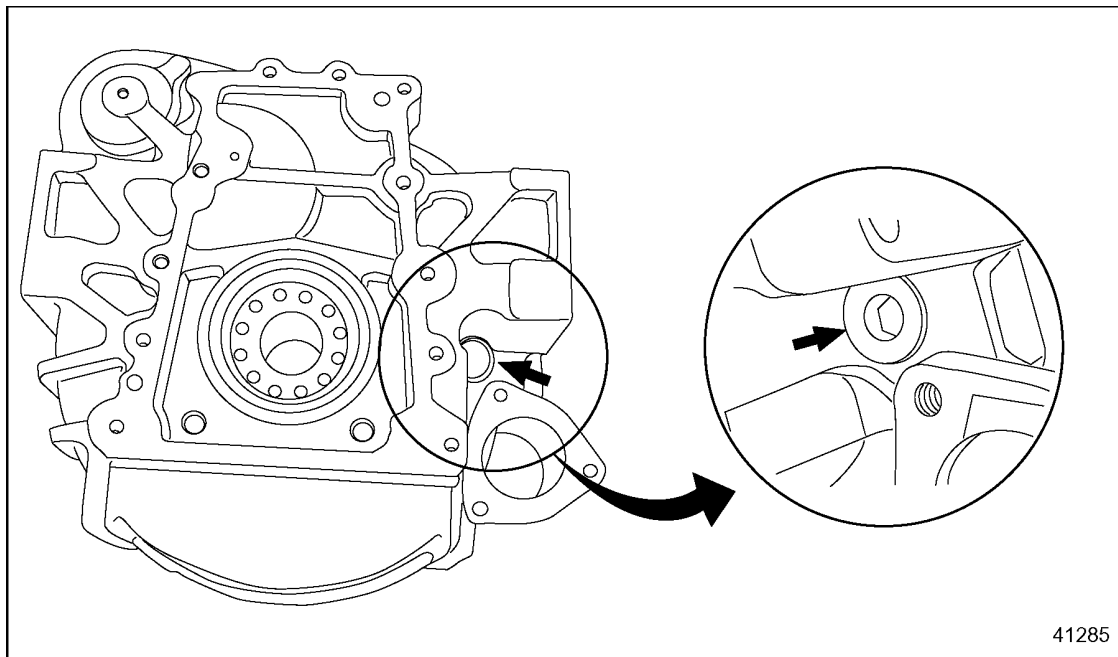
Installation of Pipe Plug Above Cranking Motor Mount
